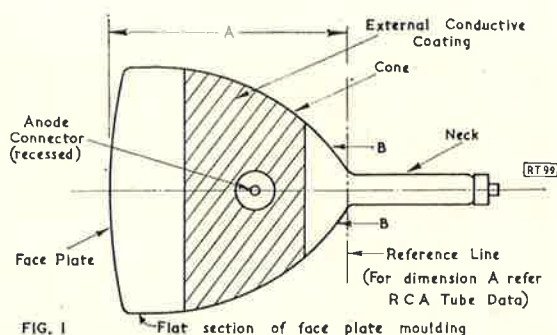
Diagram illustrating picture tube mounting (RT99).
